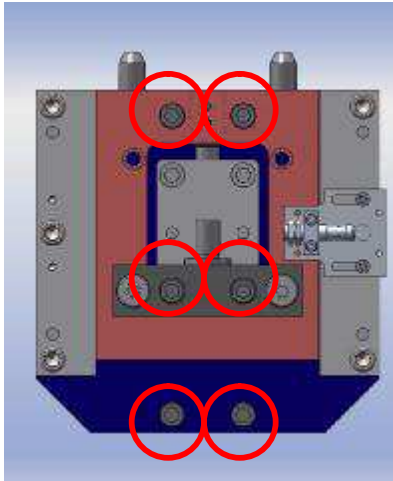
Six (6) M12 pattern for fastening the Extension to the rear plate.
